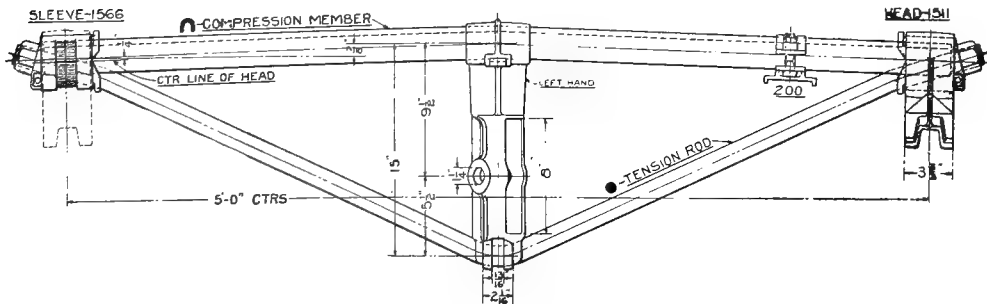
Creco Double Brake Beam for Four-wheel Passenger Trucks.
